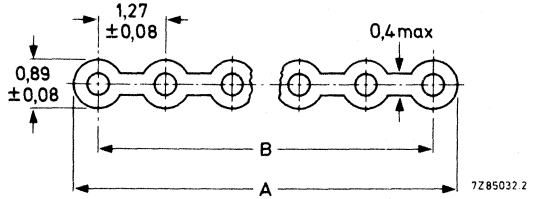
Ribbon cable; see Table 9 for dimensions A and B.
